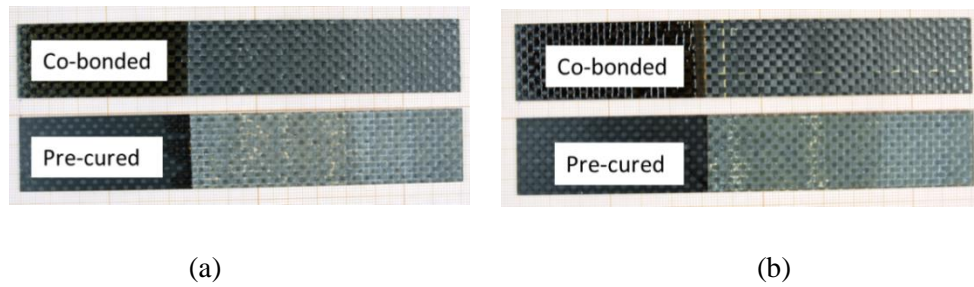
Fracture surfaces of bonded joints of adhesive film F1 with different pre-bond moisture content (a) 0.33%; and (b) 1.25%, tested at 120°C.
